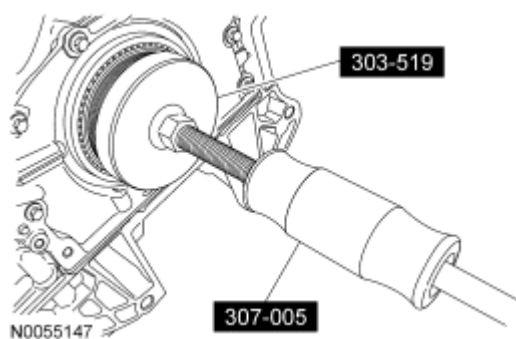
Removing Crankshaft Rear Seal Using Special Tools (303-519) & (307-005)
